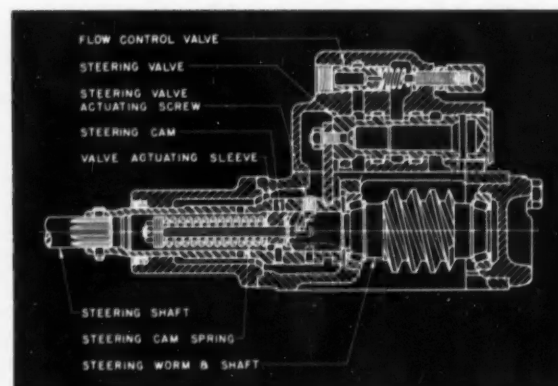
The steering valve, its actuating mechanism, and the flow control valve are in the same housing on top of the steering worm
